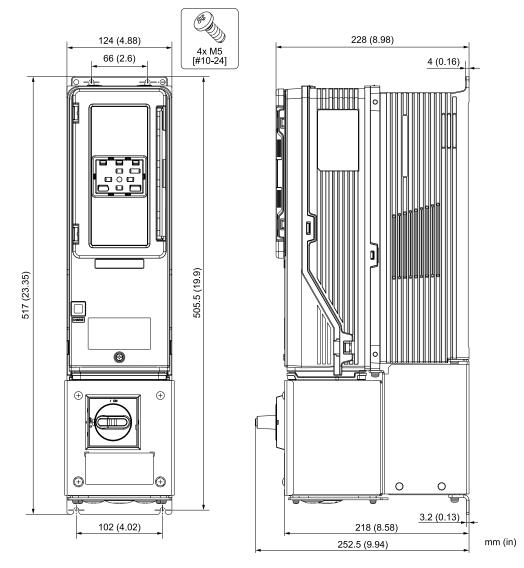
Exterior and Mounting Dimensions Diagram 1
